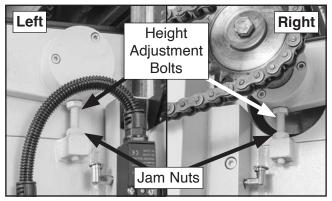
Location of rear lower pressure roller height adjustment hardware.
